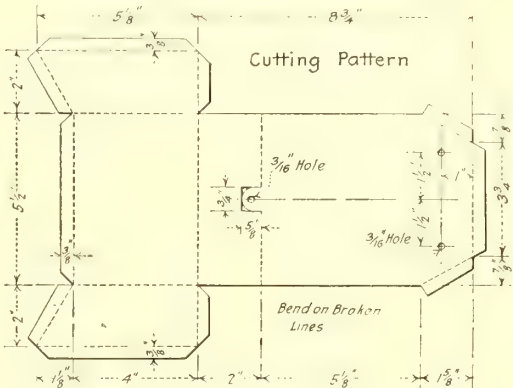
CUTTING PATTERN FOR CAR RECORD BOX
